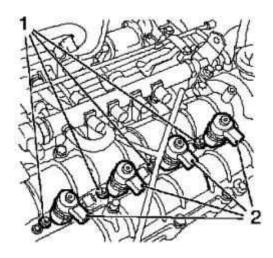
,269. Removing the fuel injectors: 1 - Nuts 2 - burner
